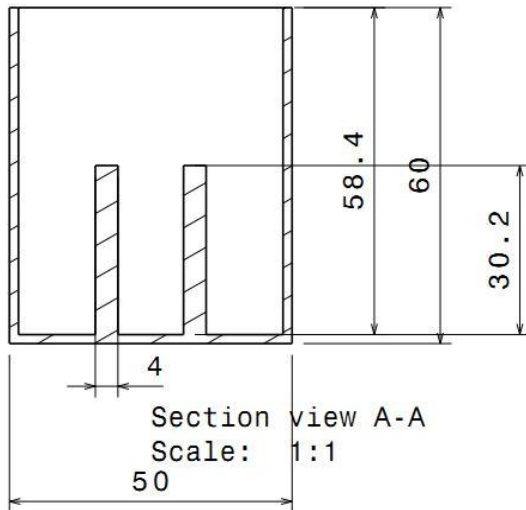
Sectional View of Heat Sink with 2 fins of Fin Thickness 4 mm and Fin Height 30mm.
